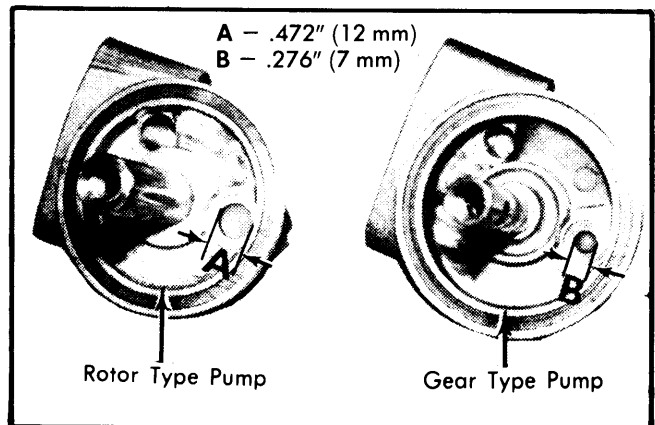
View of Oil Filter Mounts Showing Pressure Valve Holes
